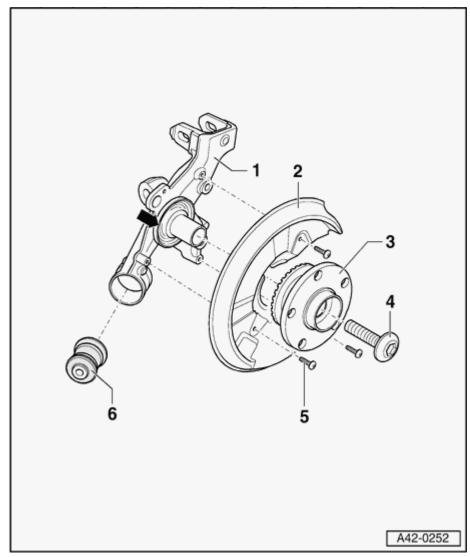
Exploded View Of Stub Axle Carrier - Front Wheel Drive Courtesy of VOLKSWAGEN UNITED STATES, INC.
